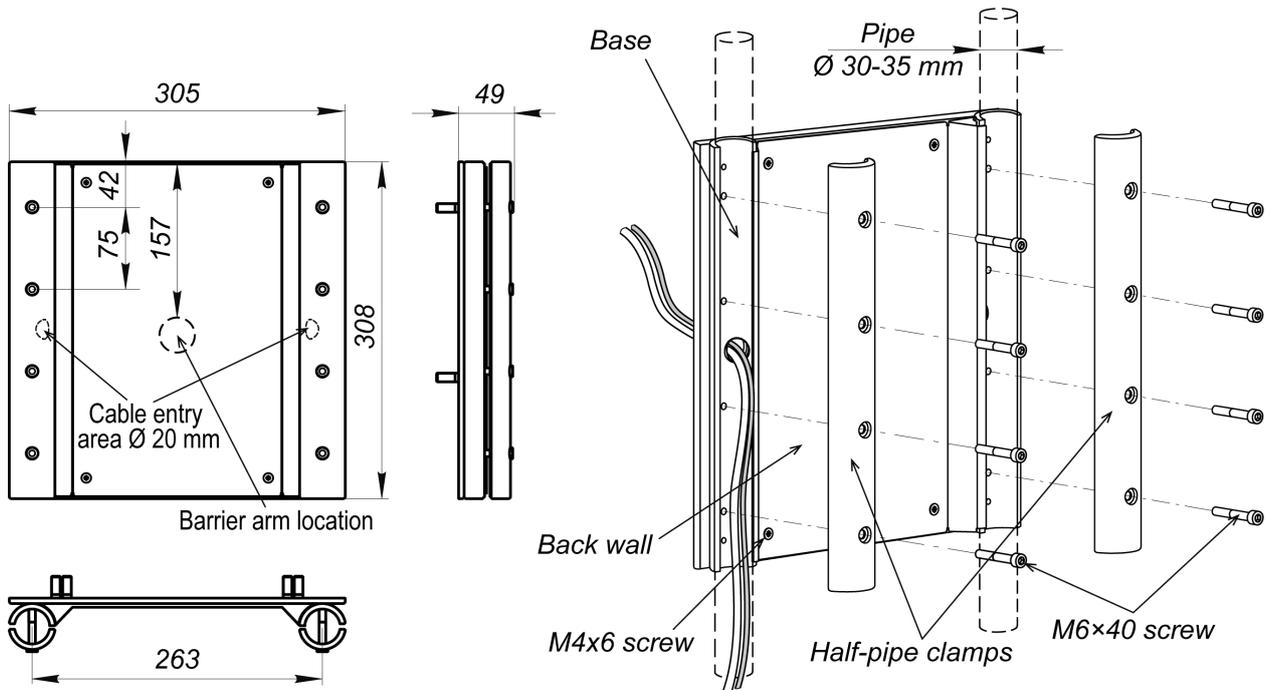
Dimensions and installation procedure for the MT10.1 mounting bracket
